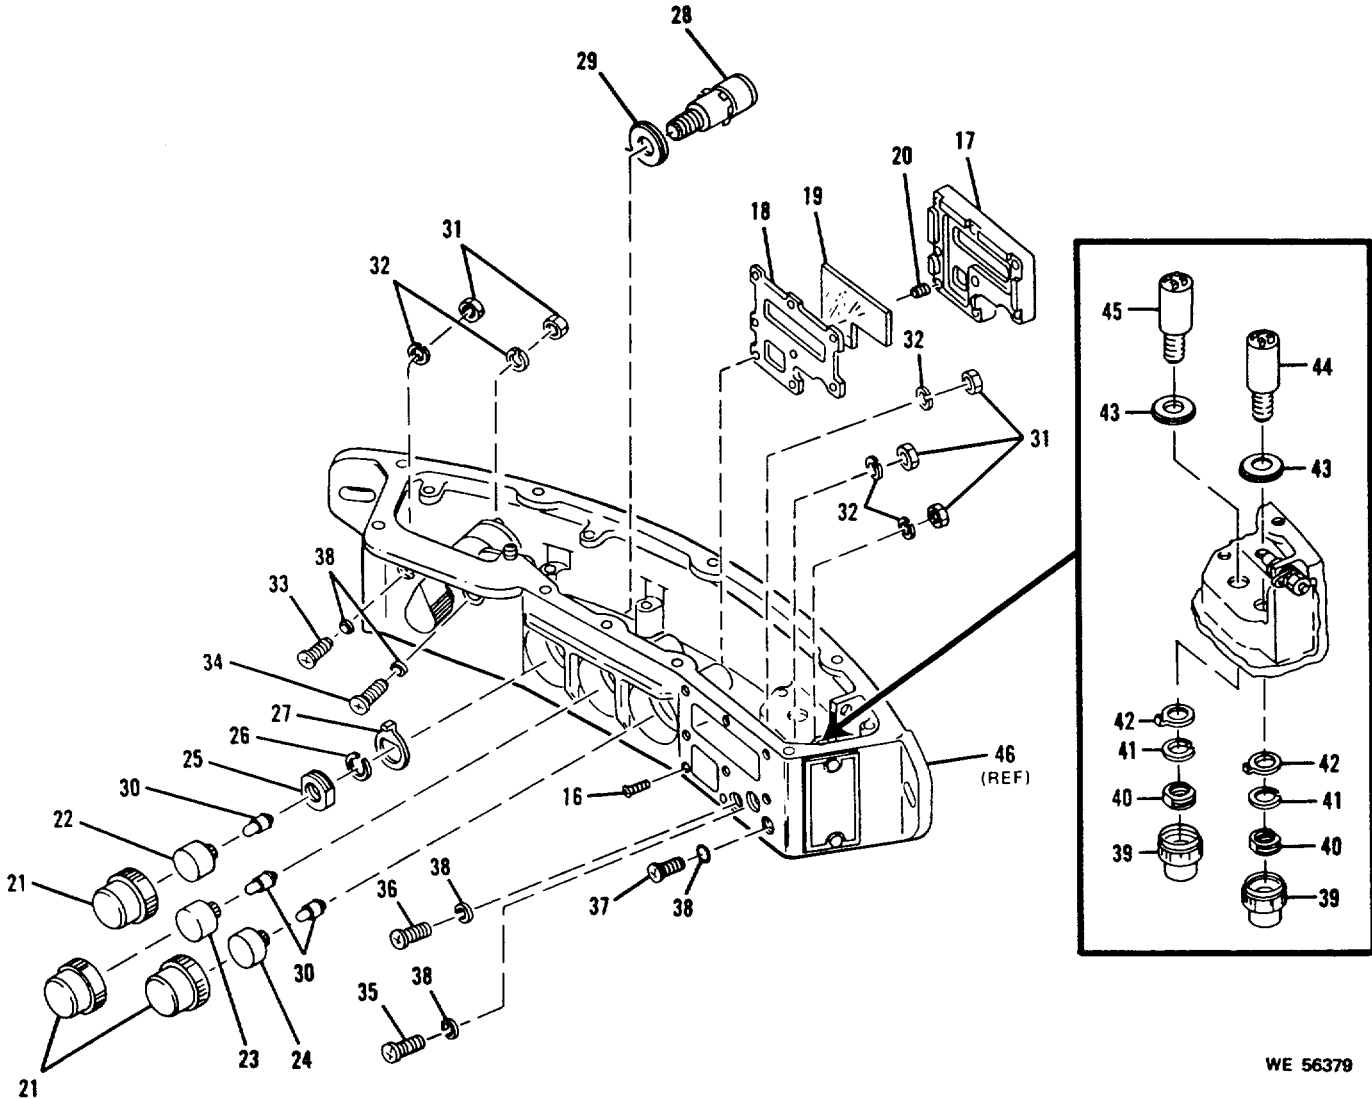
Disassembly of Laser Ranging Commander's Control C-9134/VVG-1 (A79) (Sheet 2 of 2 sheets).
